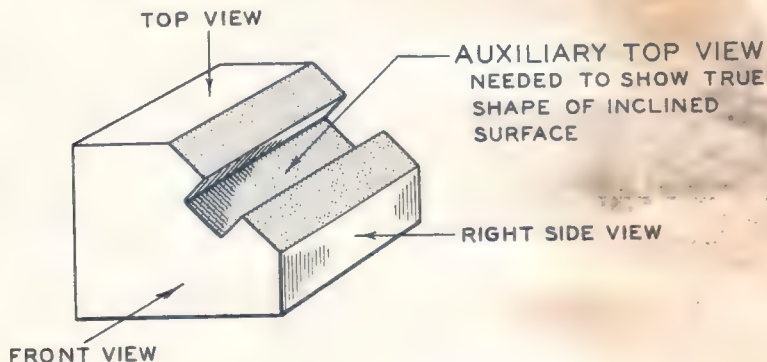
OBJECT REQUIRING USE OF AUXILIARY VIEW
